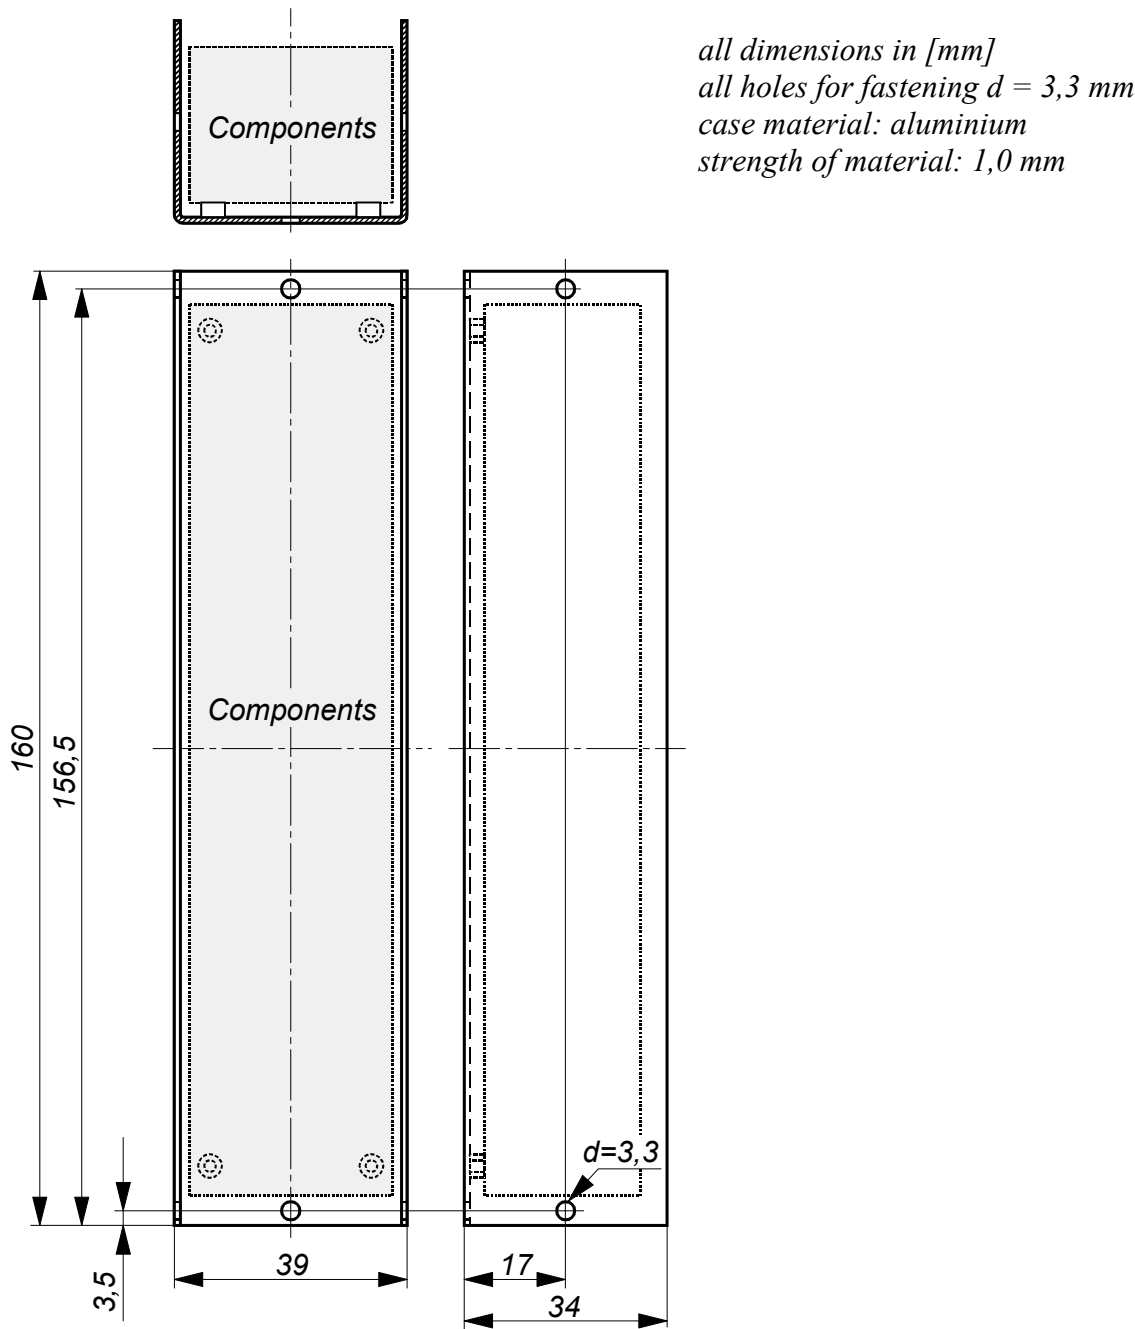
Dimensions and fastening holes of CAN-STEPCON-1H
